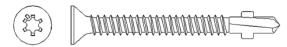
REX FLAT HEAD (RFH) SELF-DRILLING SCREW
